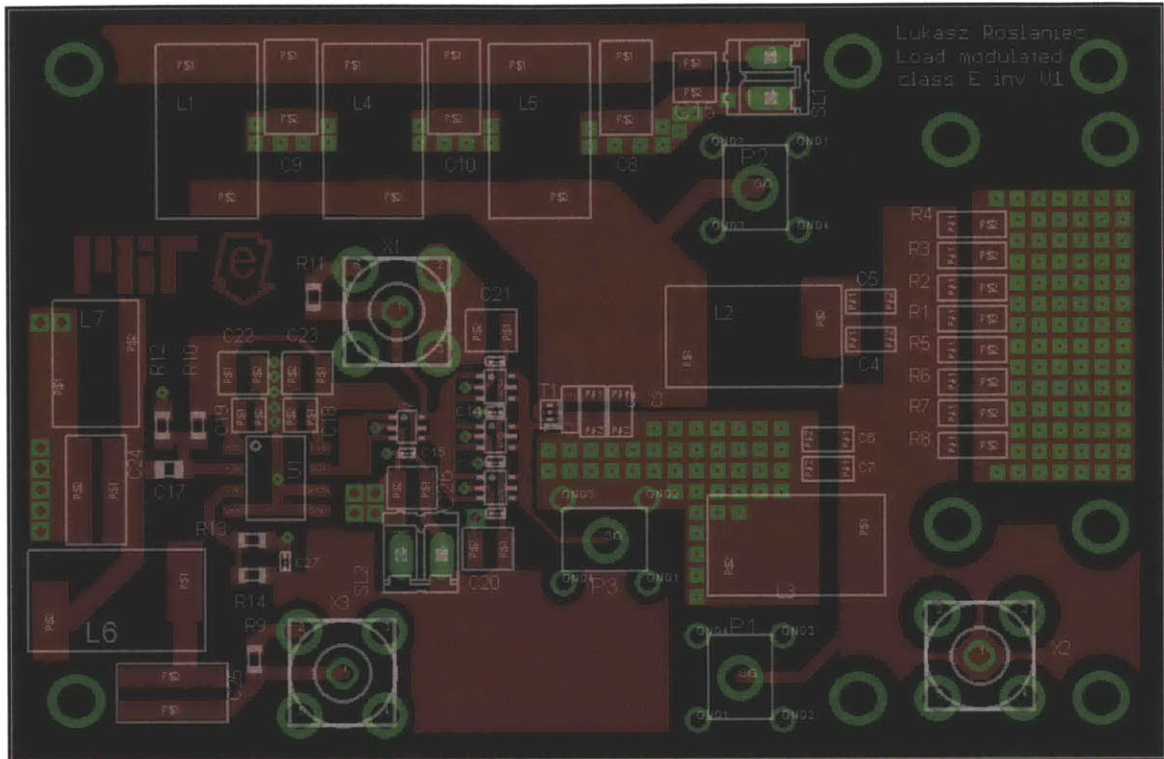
Class-E PA PCB (top layer copper/silkscreen)
